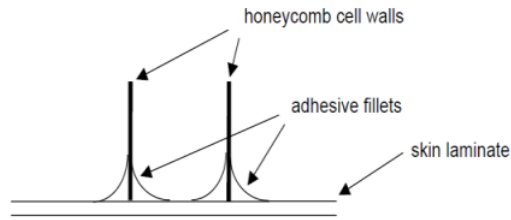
Location of Adhesive Fillet Between Honeycomb Cell Walls and Skin Laminate in Sandwich Construction [32]
